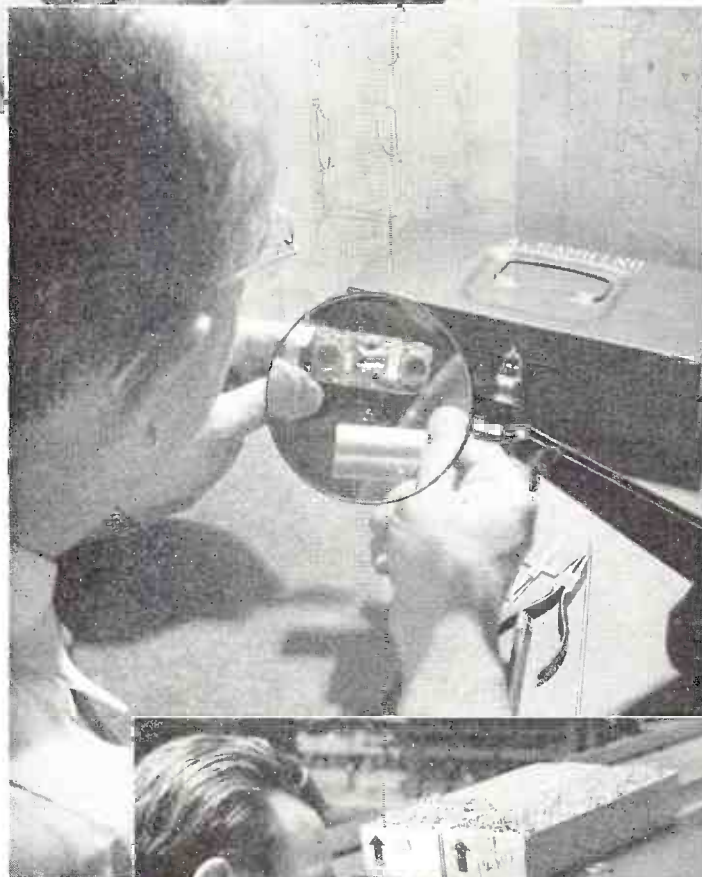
INSPECTION IS SIMPLIFIED GREATLY BECAUSE A WHOLE CIRCUIT CAN BE CHECKED WITHOUT THE NECESSITY OF DELAYING THE PROGRESS OF A CHASSIS WHICH HAS BEEN INSPECTED AT PREVIOUS STAGES OF ASSEMBLY
